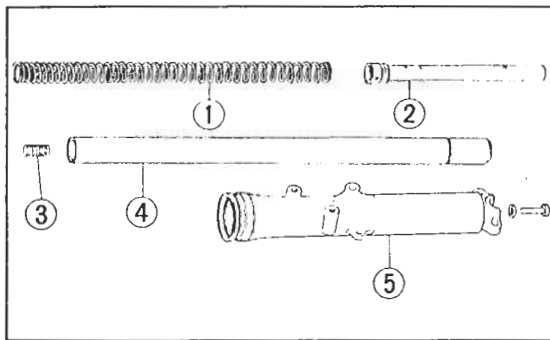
(1) Front suspension (2) Bottom pipe
